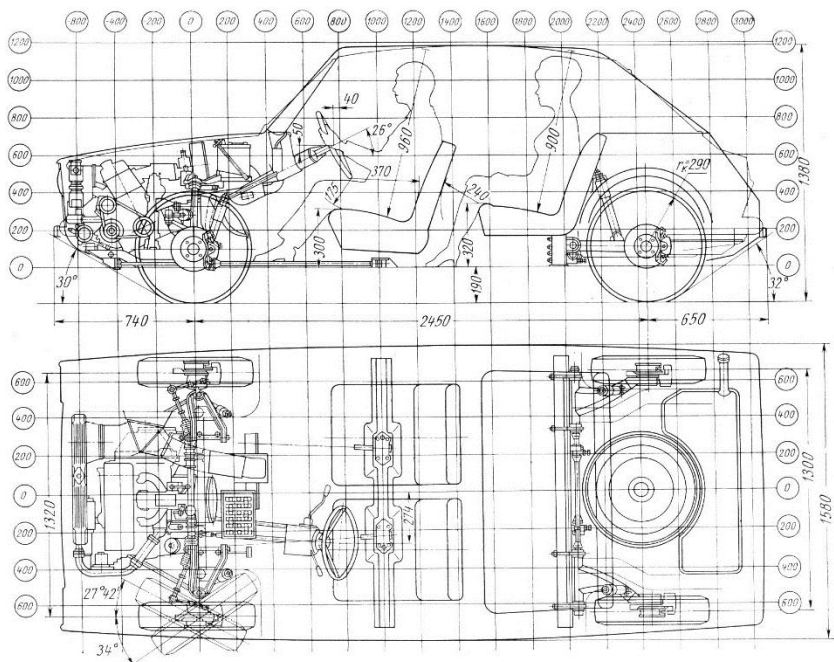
The chassis of a particularly small car with front-wheel drive
